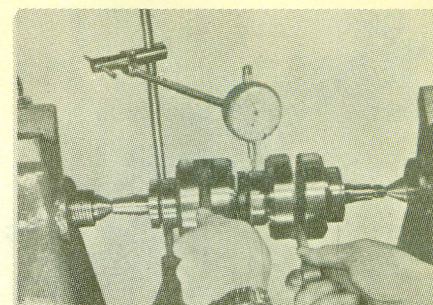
Method of measuring eccentricity with crankshaft mounted between lathe centers using a dial indicator.
